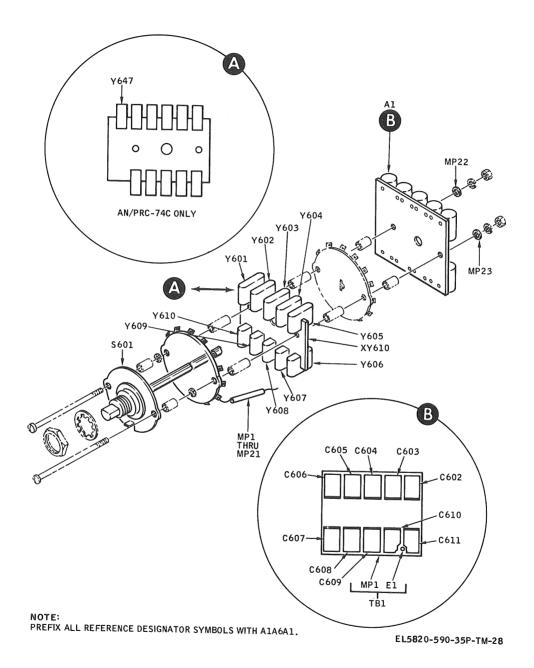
Frequency synthesizer module, switch A1 disassembly.
